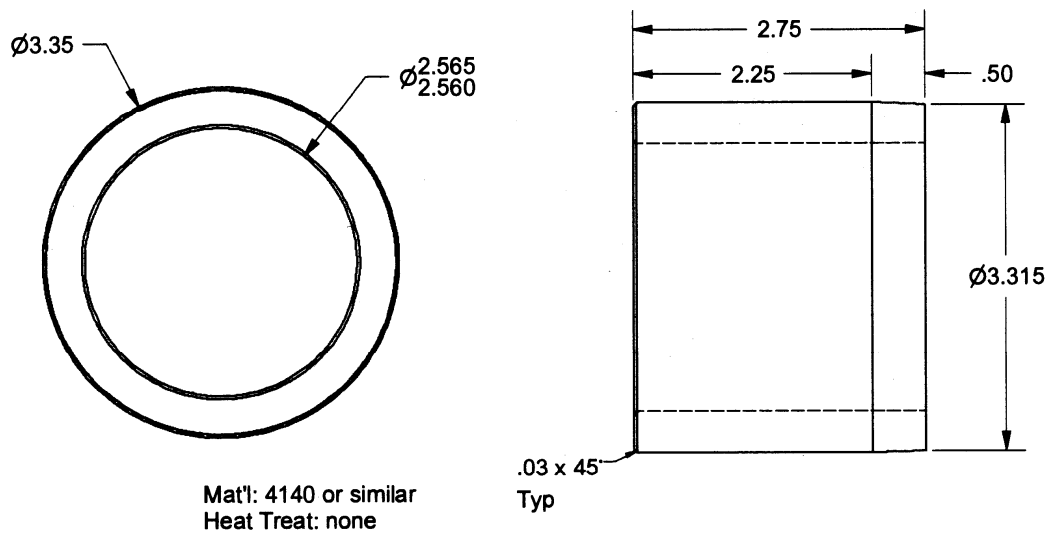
ASSEMBLY GUIDE FOR RINGS (EQ144021-05)
